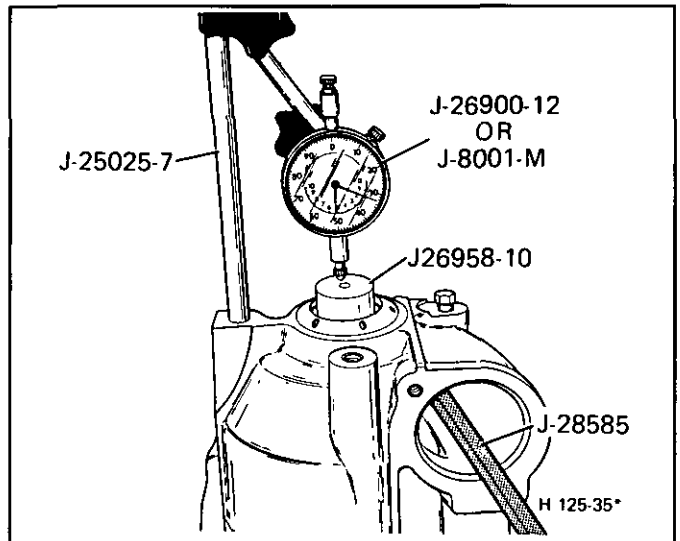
Final Drive End Play Selective Thrust Washer Measurement (680)
